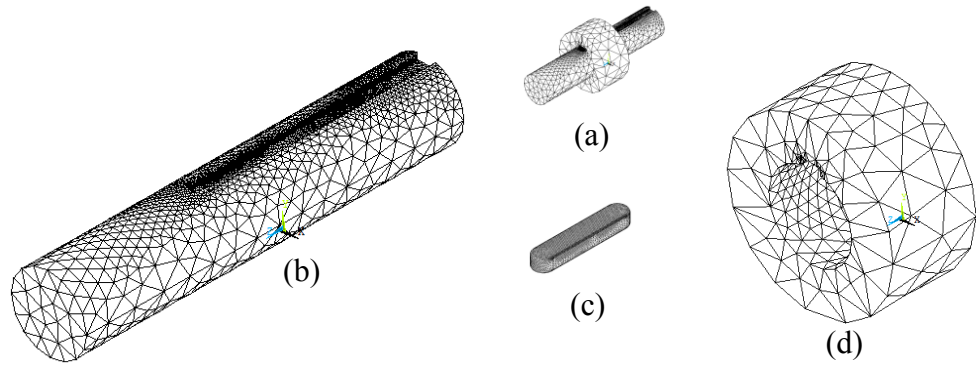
FEM model of bending model of hub, key and shaft with end milled keyway, (a) Assembled parts, (b) Shaft, (c) Key, (d) Hub
